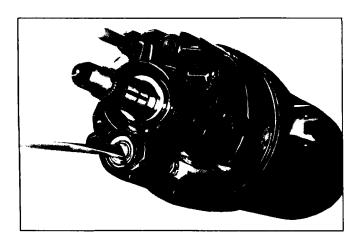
Removing or Installing Tilt Spring Retainer
